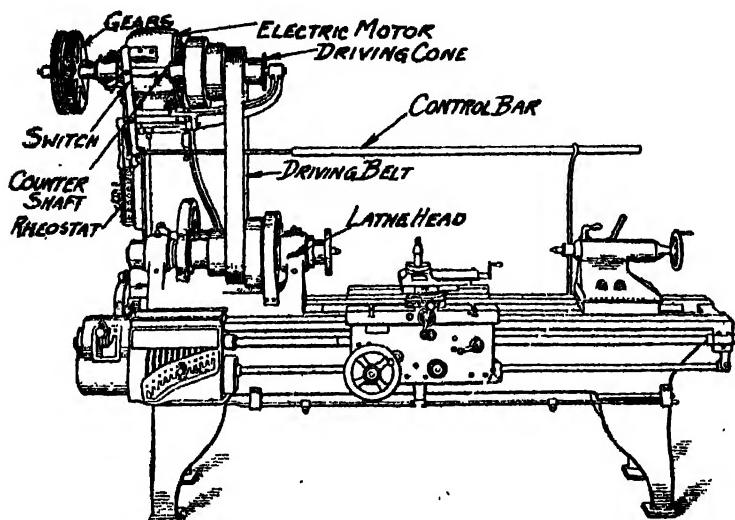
Form of Lathe Adapted for Direct Drive from Electric Motor.
